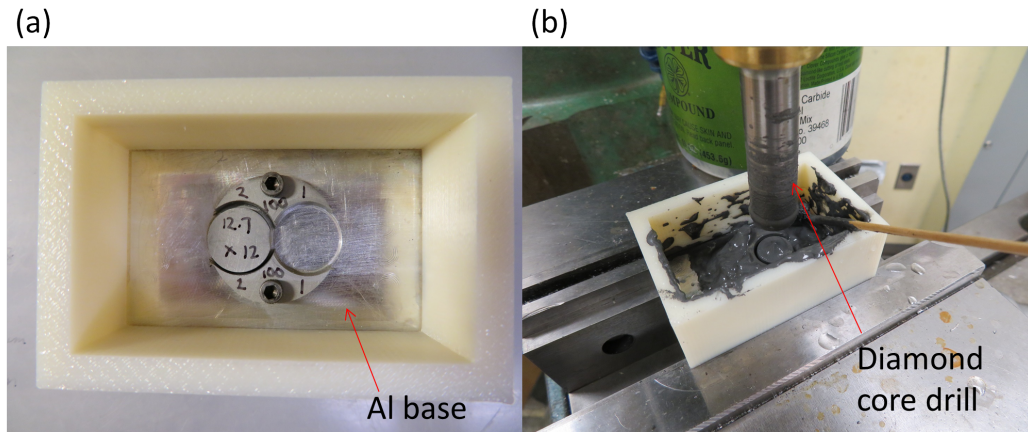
Machining process of Mo single crystal sample. (a) A Mo single crystal disc screwed onto an Al block. (b) Two samples being cut out from a disc by diamond core drill.
